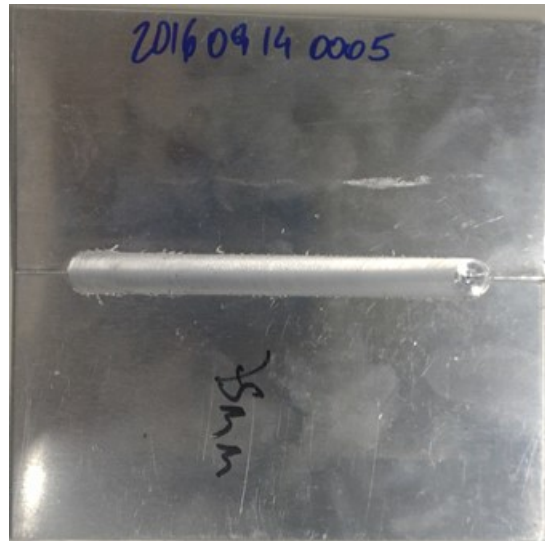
Welding plates sample used in the processing by FSW.
